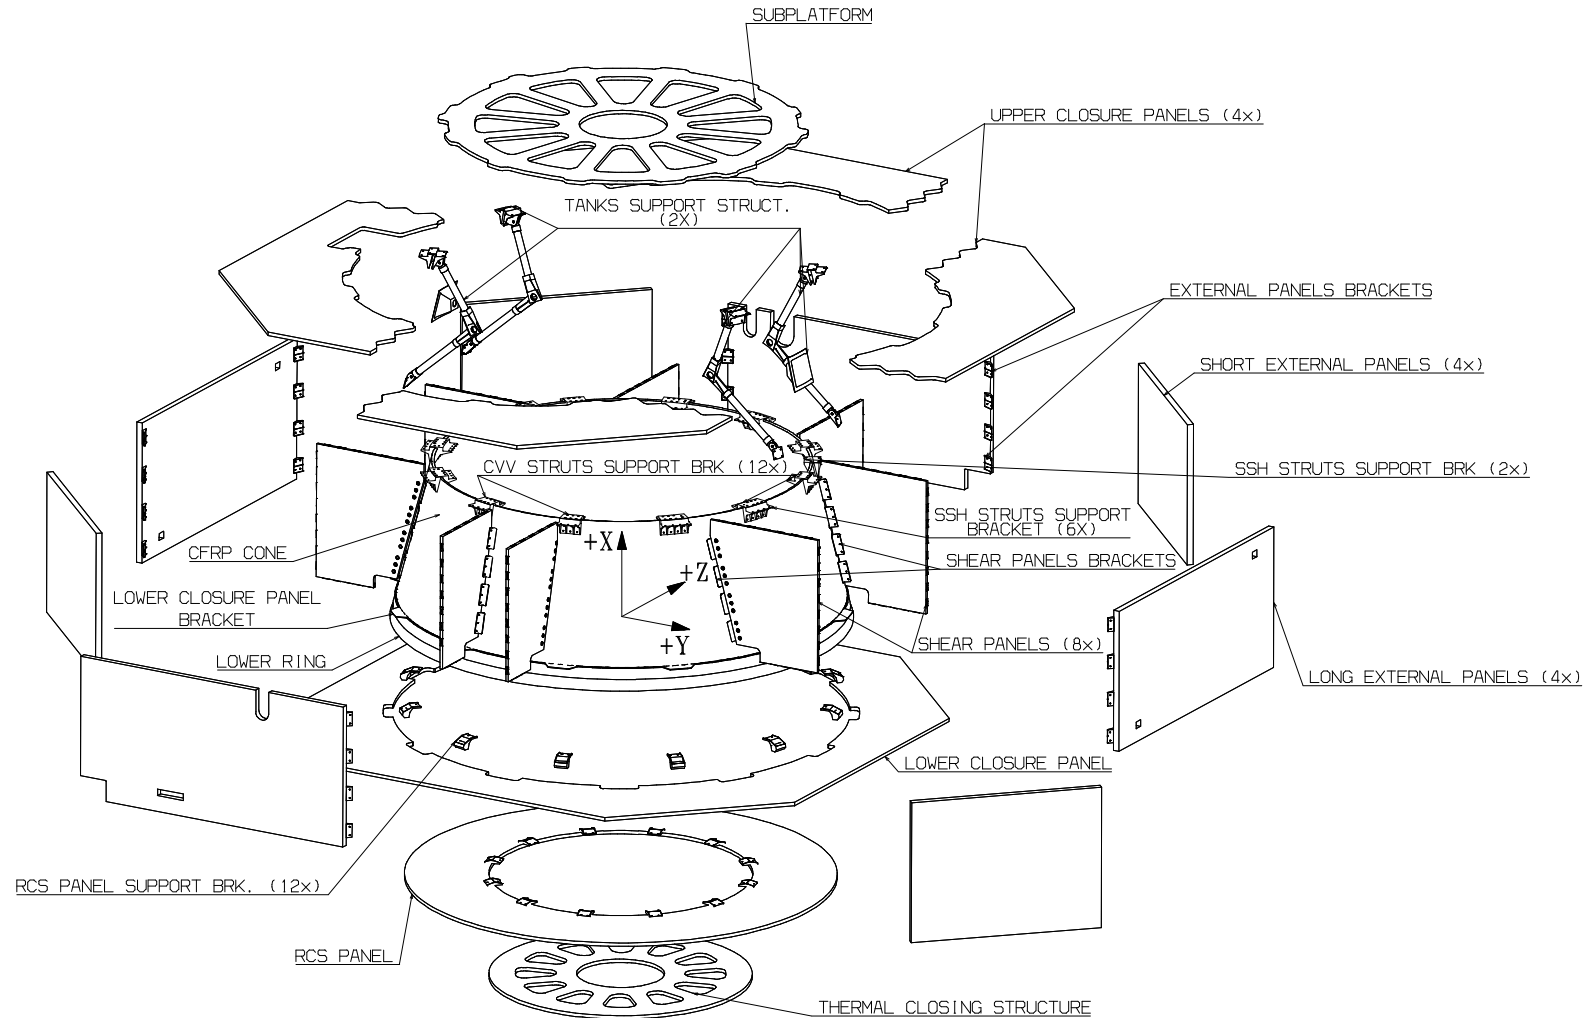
Exploded view of Herschel SVM Structure
